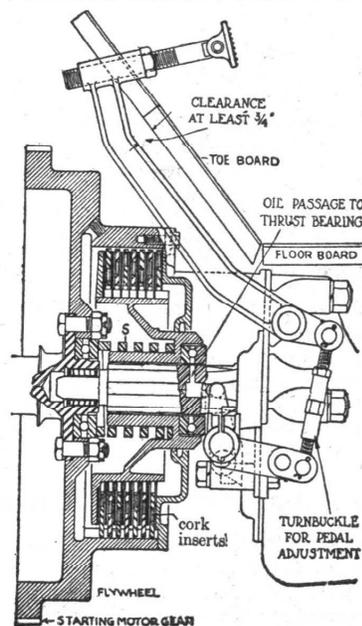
Sectional view of a multiple-disk cork-insert lubricated type of clutch. Note adjustable foot-pedal.
